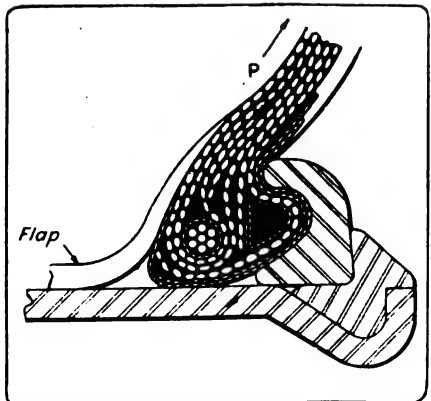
Heavy Wire Bead on Quick-Detachable Clincher Tire.
